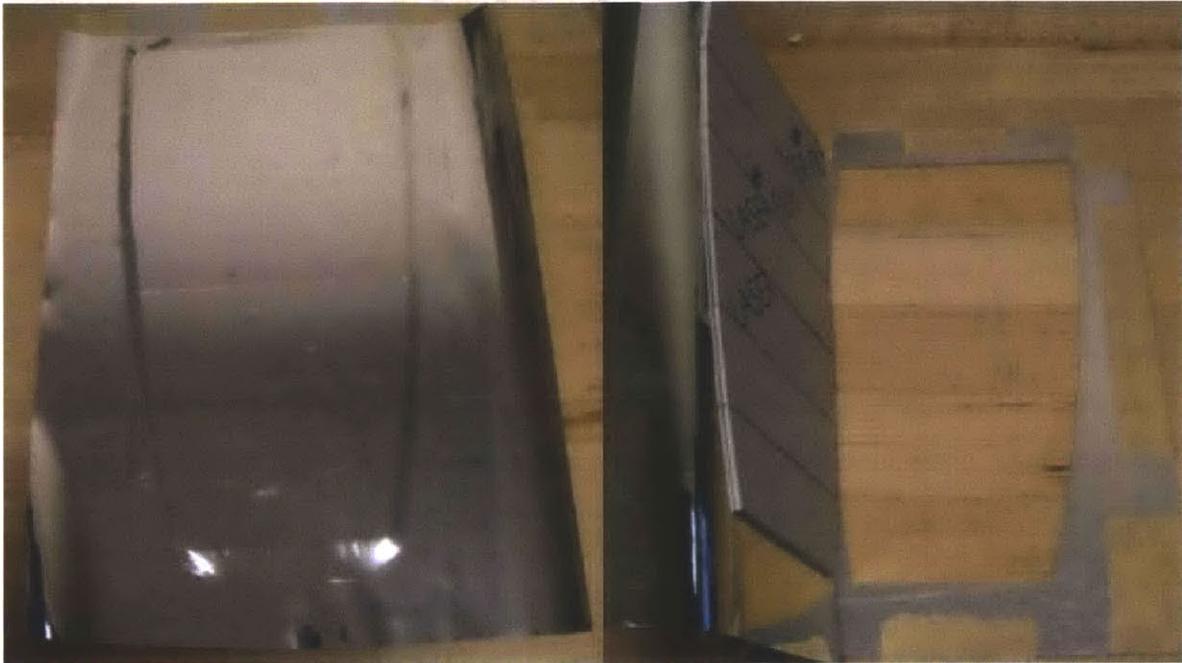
Application of ReflecTech® mirror film on the panels to make facet assembly.
